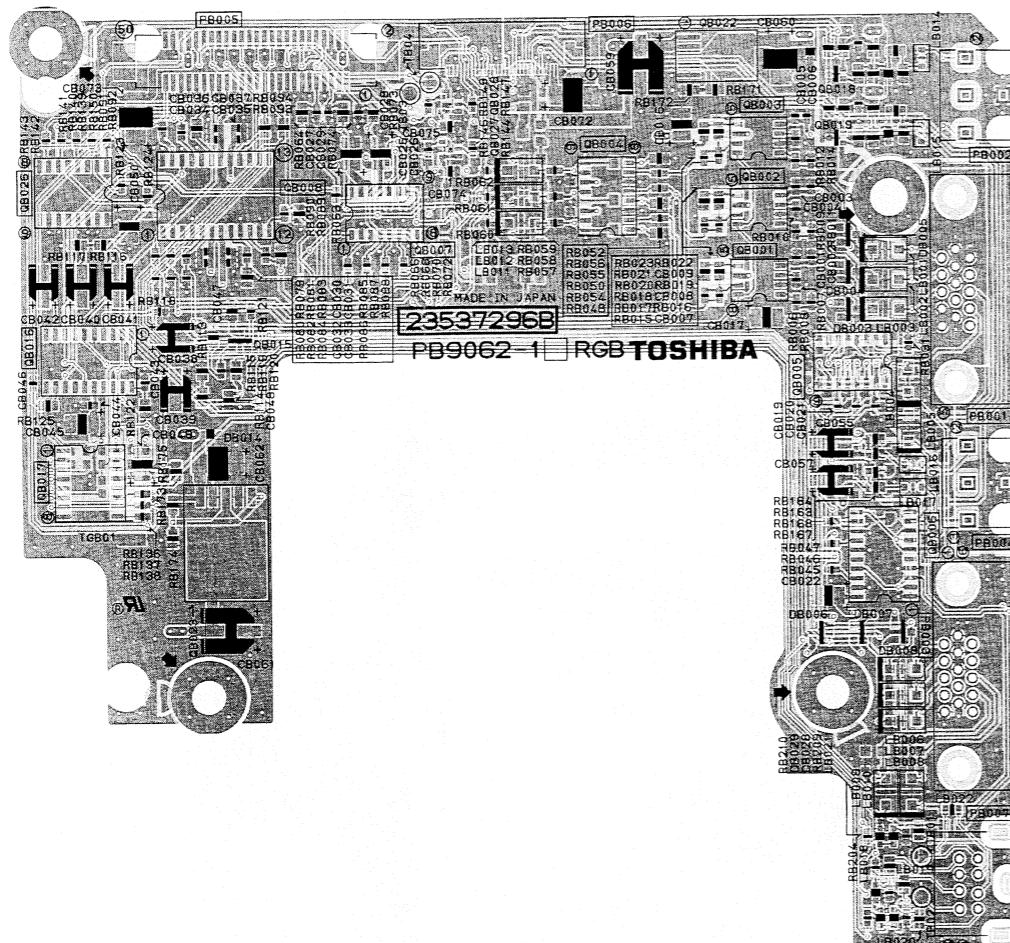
U0021 RGB PC Board (Top Side)
